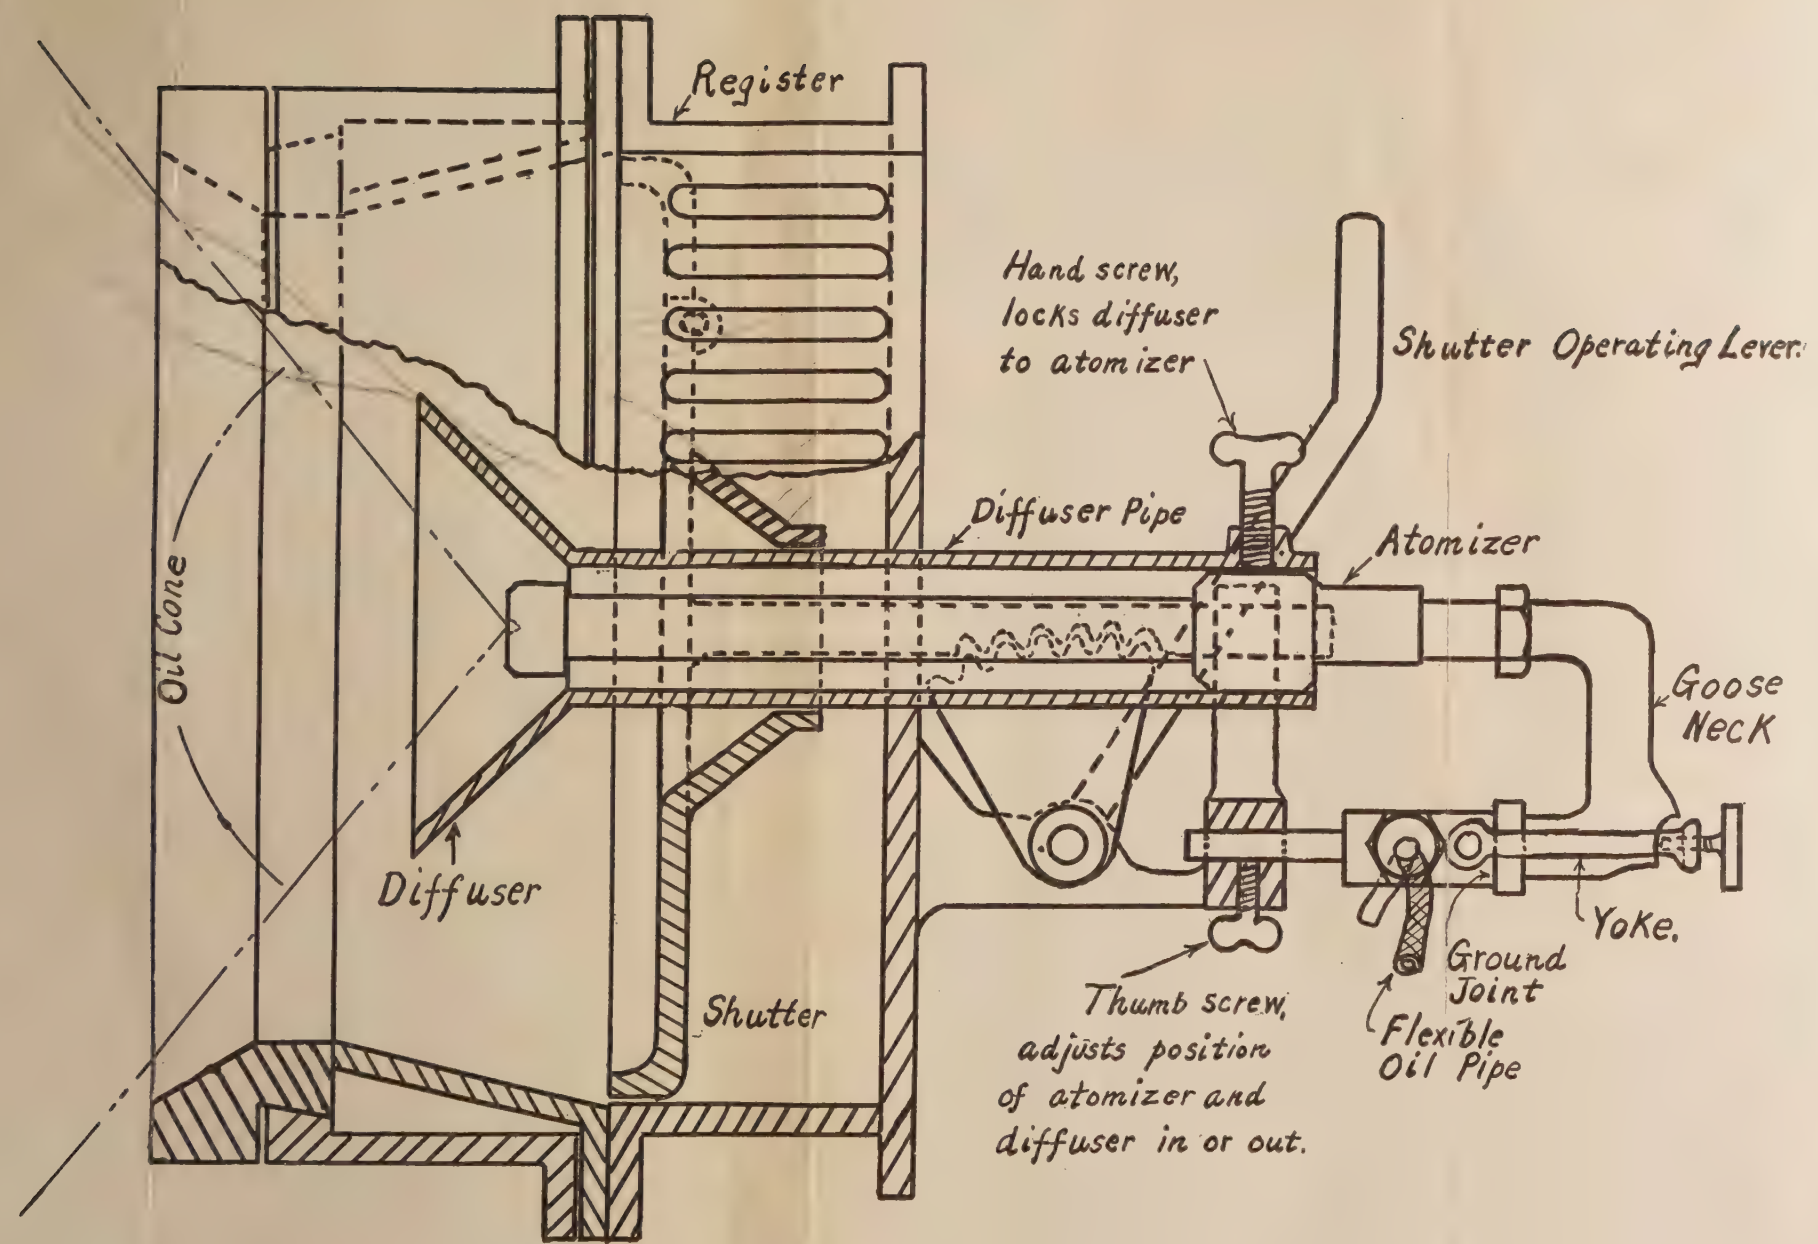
Natural Forced Draft Burner. Bureau of Engineering Type 1.
